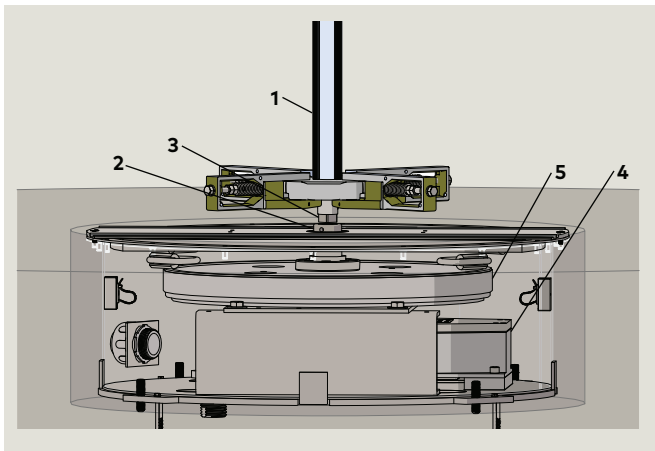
Bottom plug inserted in bottom plug adapter
